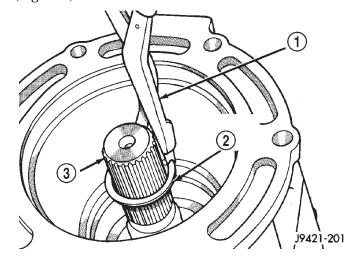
Installing Rear Bearing Snap Ring—4WD
